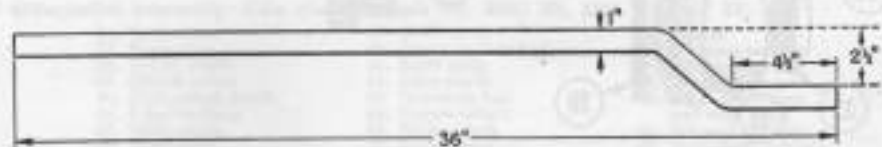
Special drift used to drive bearing cup, paragraph 234.
